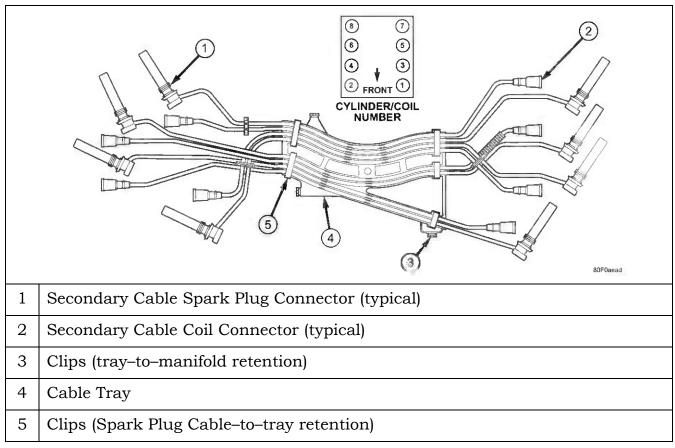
Early 5.7L Spark Plug Cable Routing and Cable Tray
